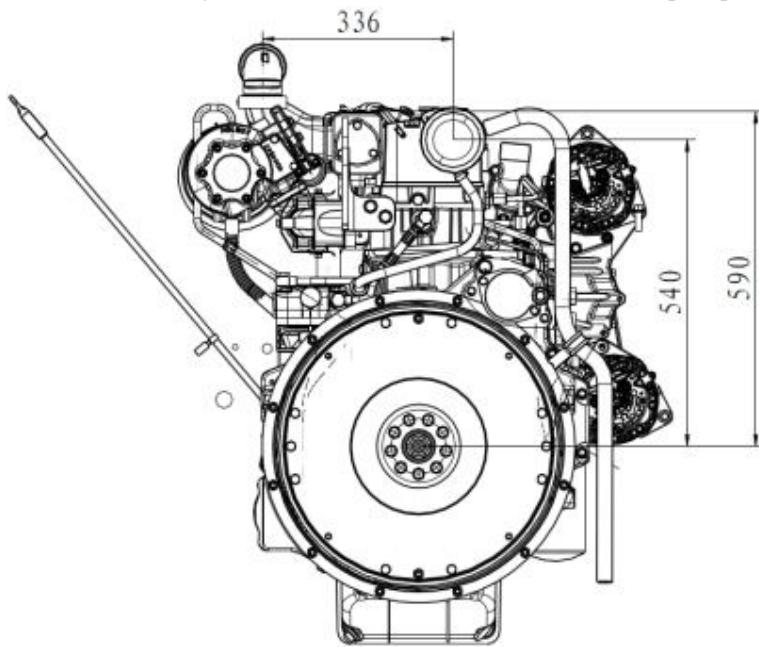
Backside of WP5 Euro IV-standard electronic oil pump diesel engine
